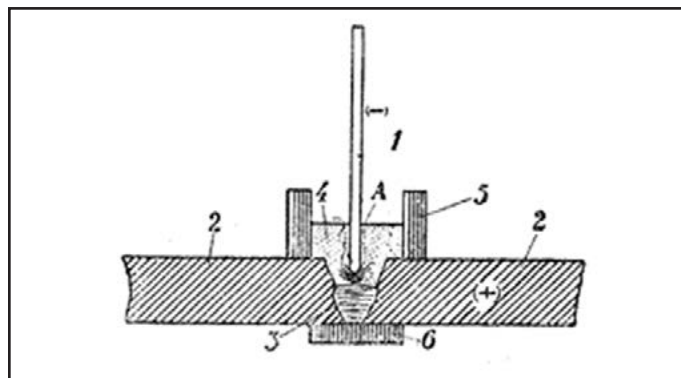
Scheme of welding copper under a powder layer according to USSR patent no. 10578: 1 - copper rod (pole “-”); 2 - elements being welded (pole “+”); 3 - liquid metal formed from melting the rod in the electric arc (weld pool); 4 - layer of powder; 5 - wall preventing powder spilling; 6 - washer forming the root of a weld; A - crater enabling the observation of a welding process (page 2 of the patent description [9])
